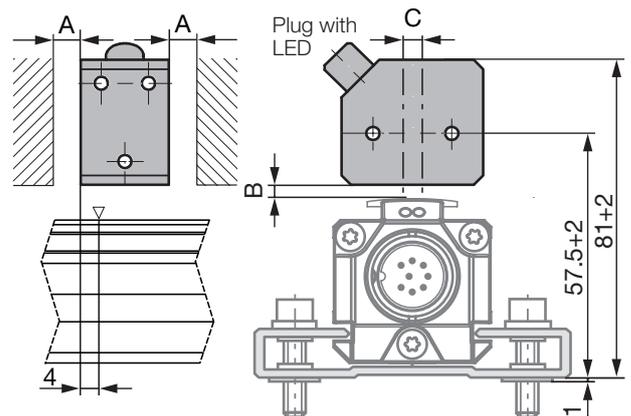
Dimensions and distances with BTL5-P-4500-1 electromagnet (24 V/100 mA)
